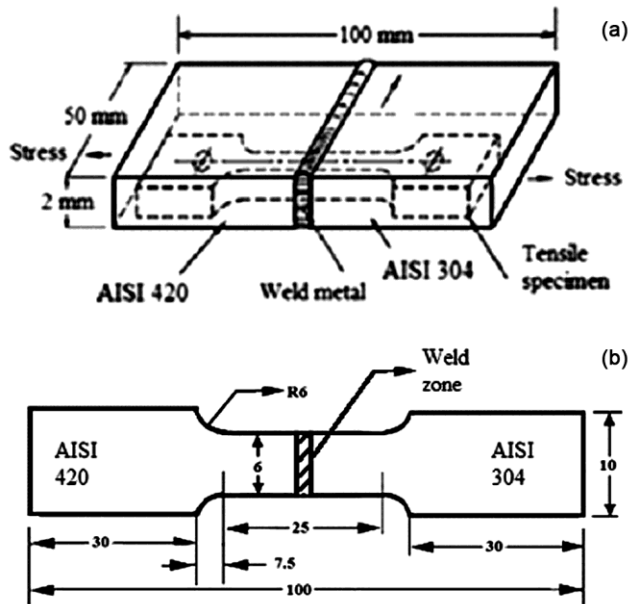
Tensile test specimen (a) Cutting out a tensile test specimen and (b) ASTM E8 sub-size specimen.
